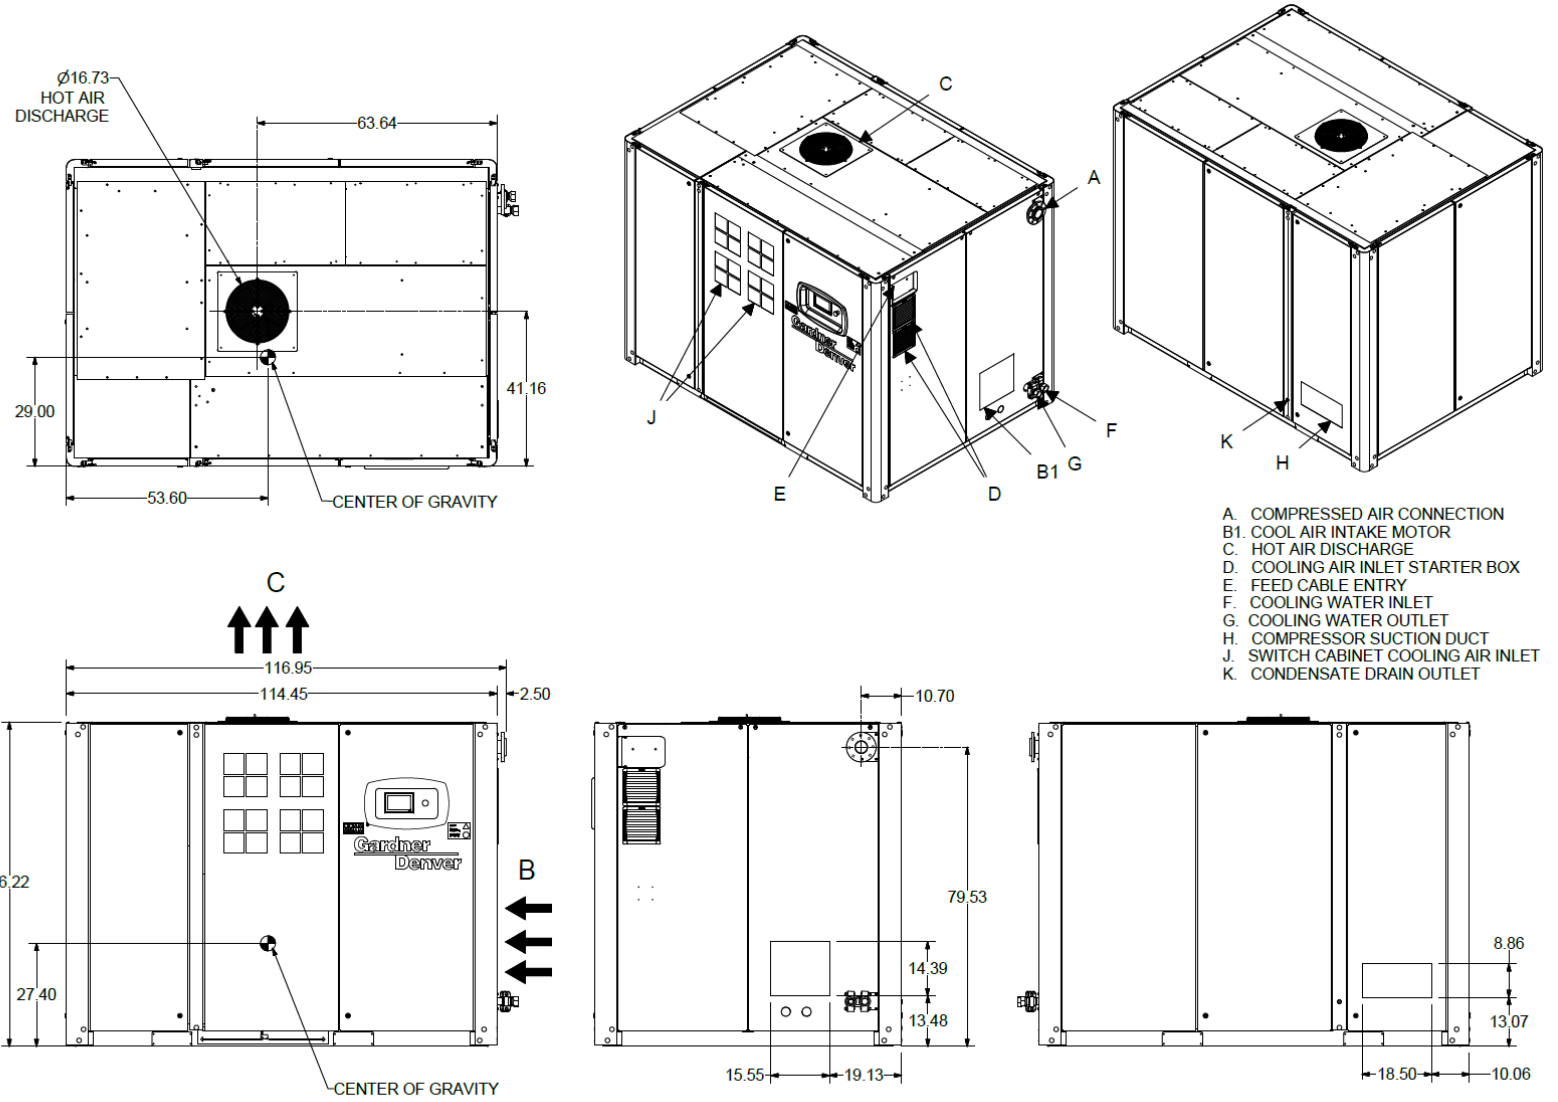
Water-Cooled Unit (all dimensions in inches)
